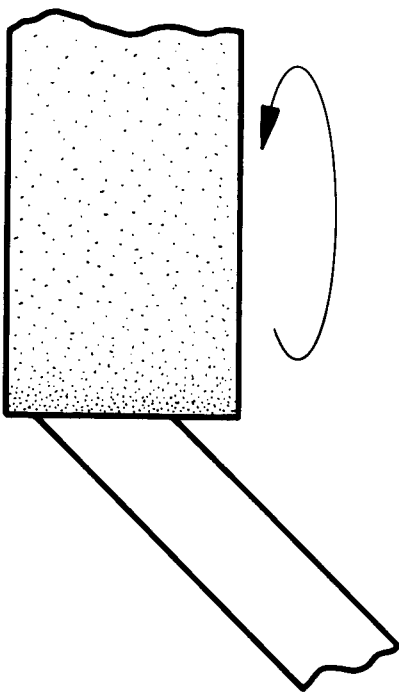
Grinding the end relief and end-cutting edge angles.
